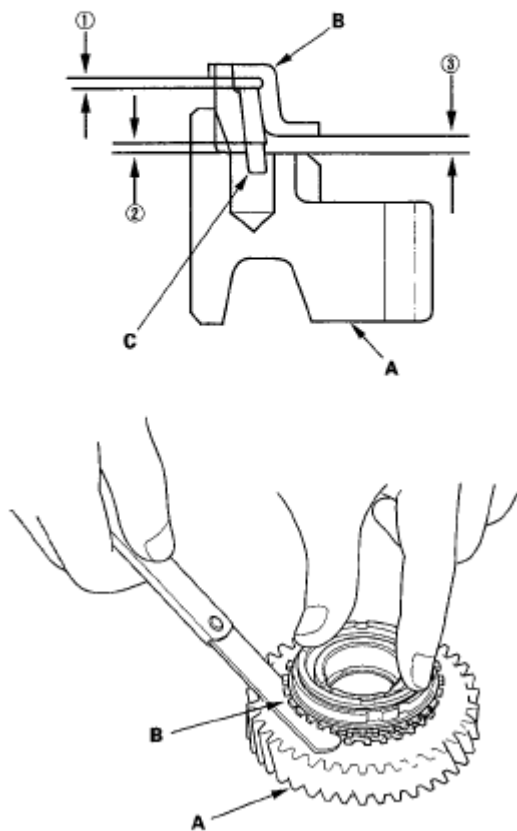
Measuring Clearance Between Each Gear And Synchro Ring
